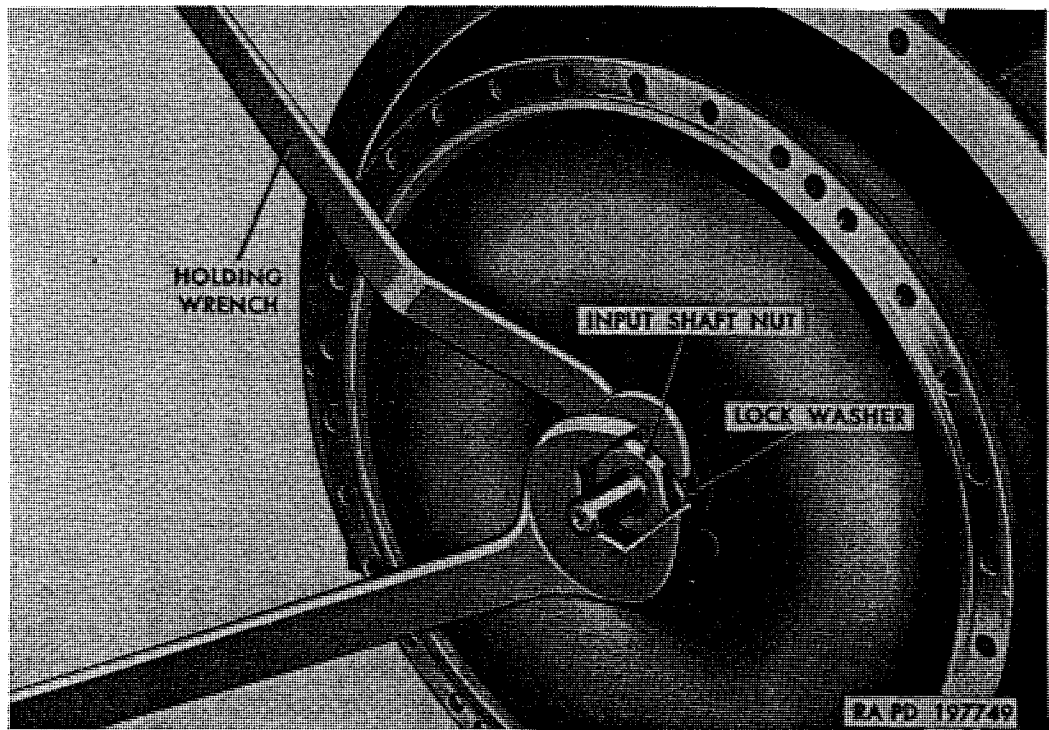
Using holding wrench B7950256 to hold fluid coupling.
